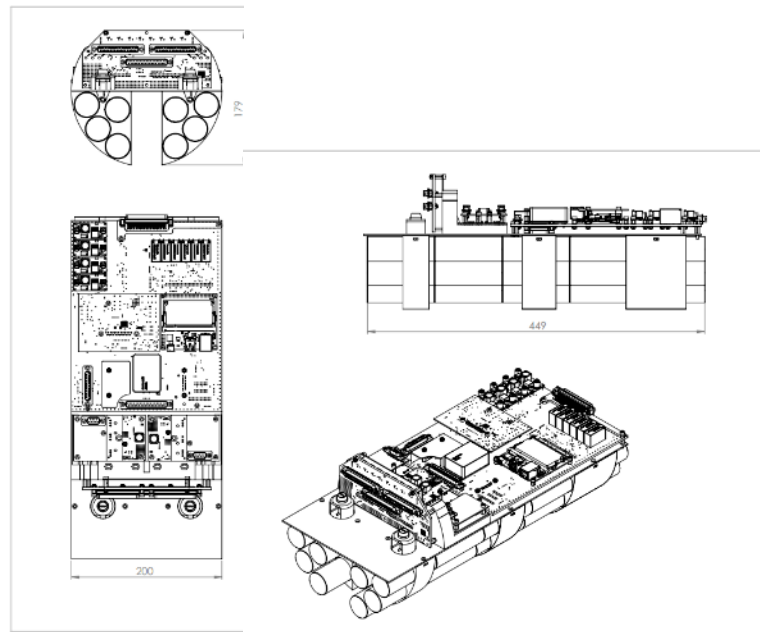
Engineering drawings of the stern drawer, including battery pack and electrical control devices by Gabri SRL.
